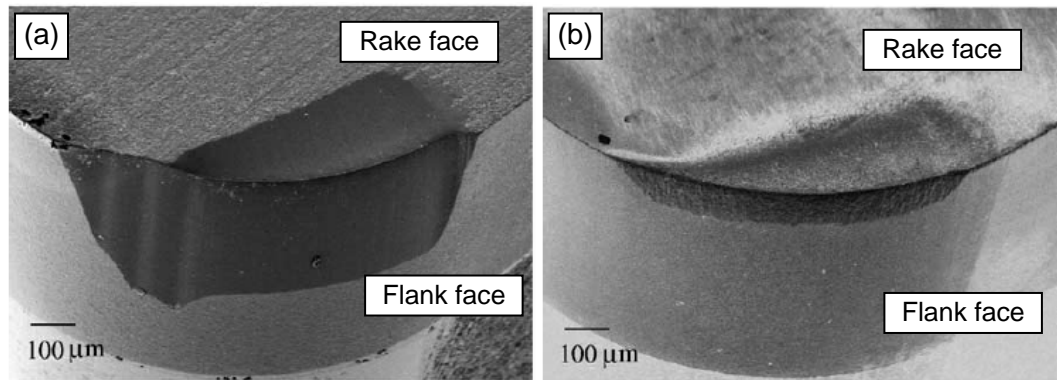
(a) PCBN and (b) PCD tools used to machine Al-SiC MMC at 50 m/min without coolant [181]
